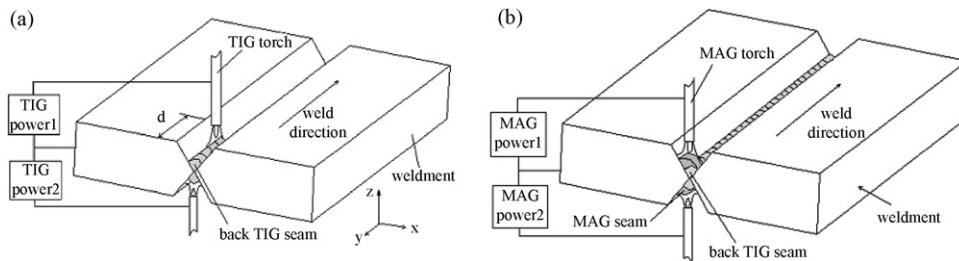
Schematic diagram of DSAW. (a) Back welding by asymmetric GTAW. (b) Filler welding by symmetric GMAW.
